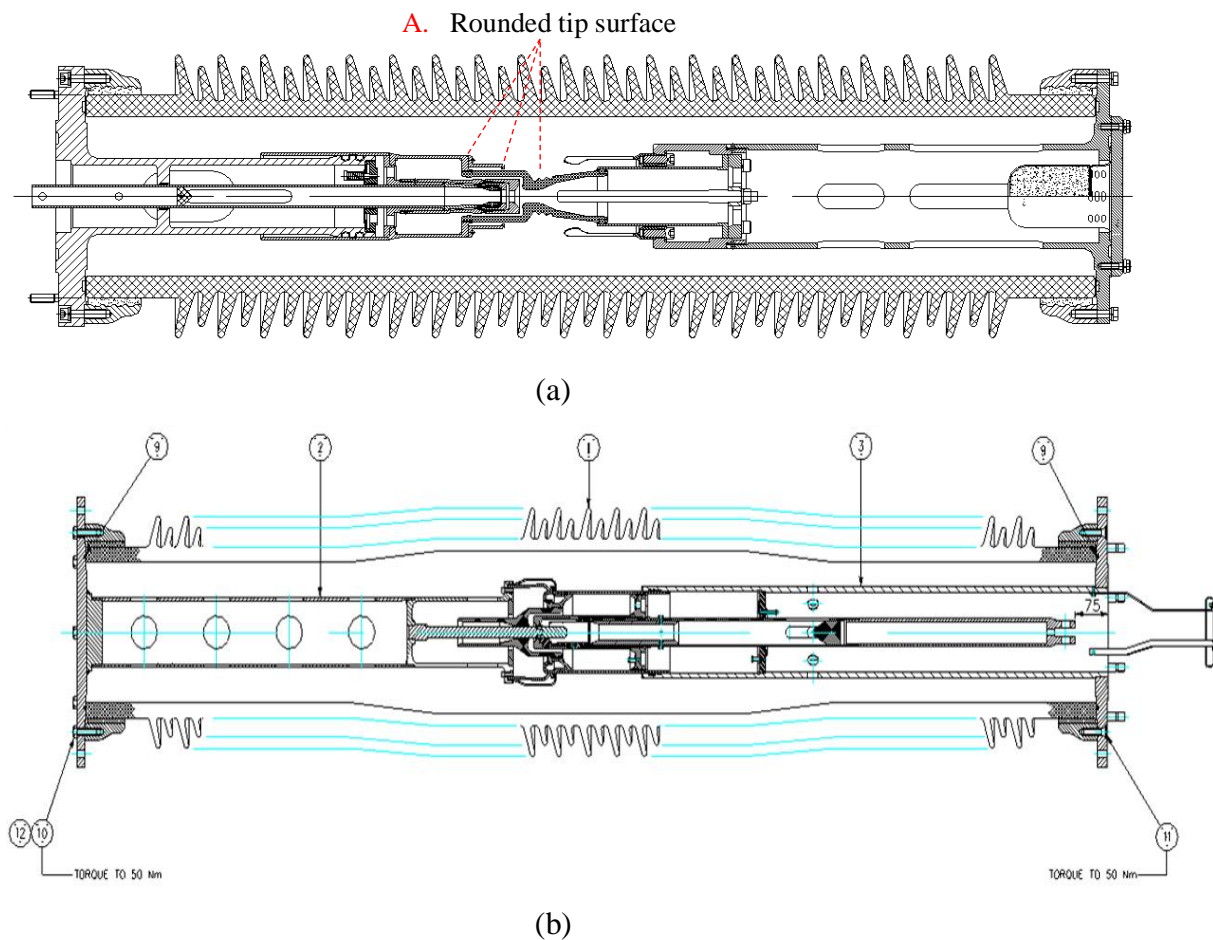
CAD drawing of the whole geometry of (a) 145 kV auto-expansion circuit breaker (b) 245 kV auto-expansion circuit breaker
